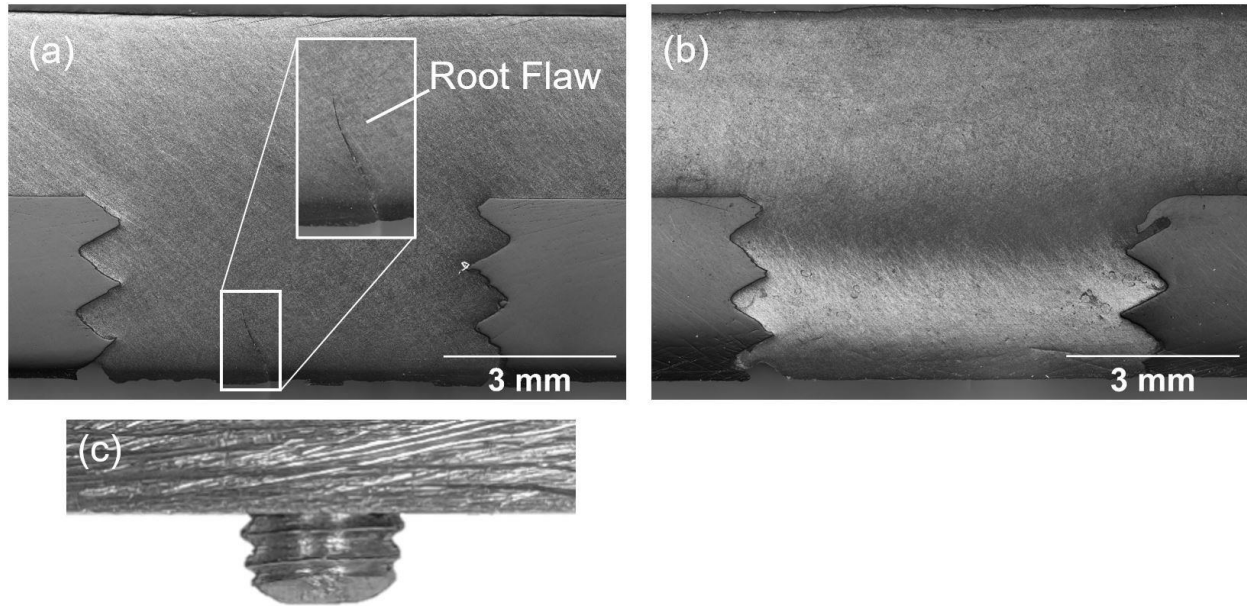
BFSF Images. (a) M7-1.0 axial cross-section with the advancing side on the right side of the image, root flaw emphasized, (b) M7-1.0 lateral cross-section with the weld advancing from right-to-left, and (c) formed aluminum unscrewed from steel.
